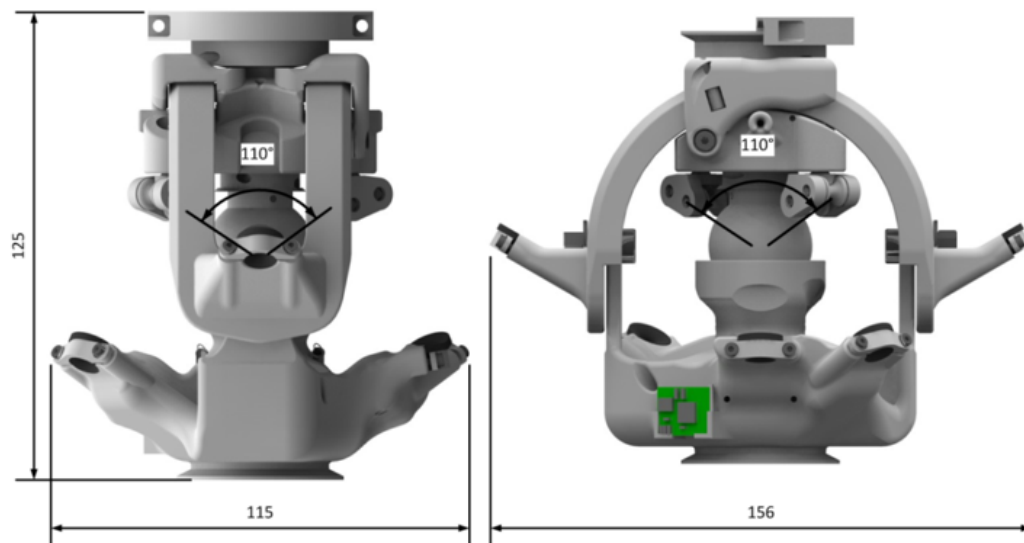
Main dimensions of the ball-and-socket joint prototype
